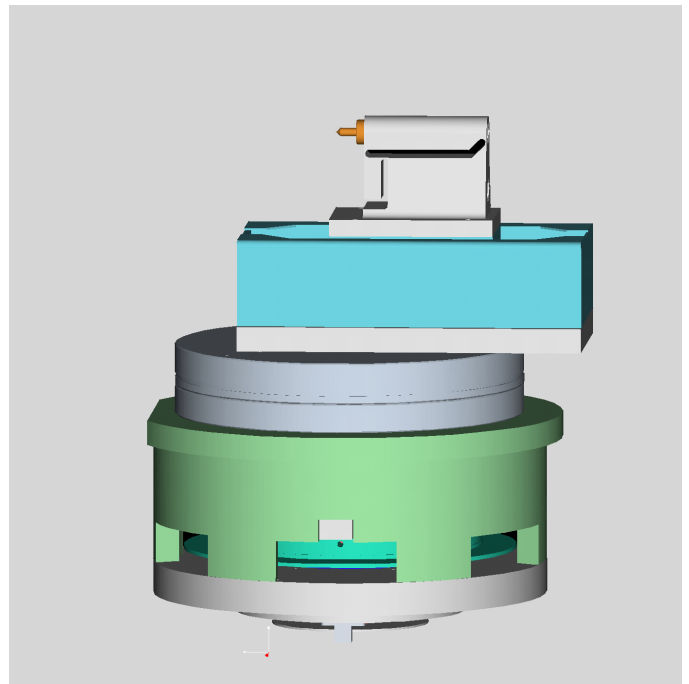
The rotary axis/linear axis/LVDT assembly can be removed and operated independently for testing.
